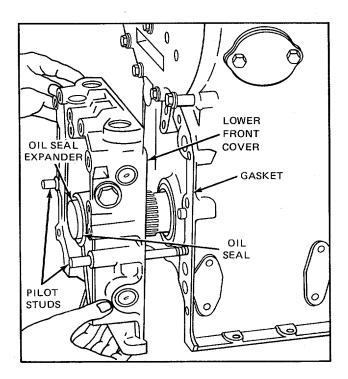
Installing Lower Engine Front Cover - In-Line Engine
